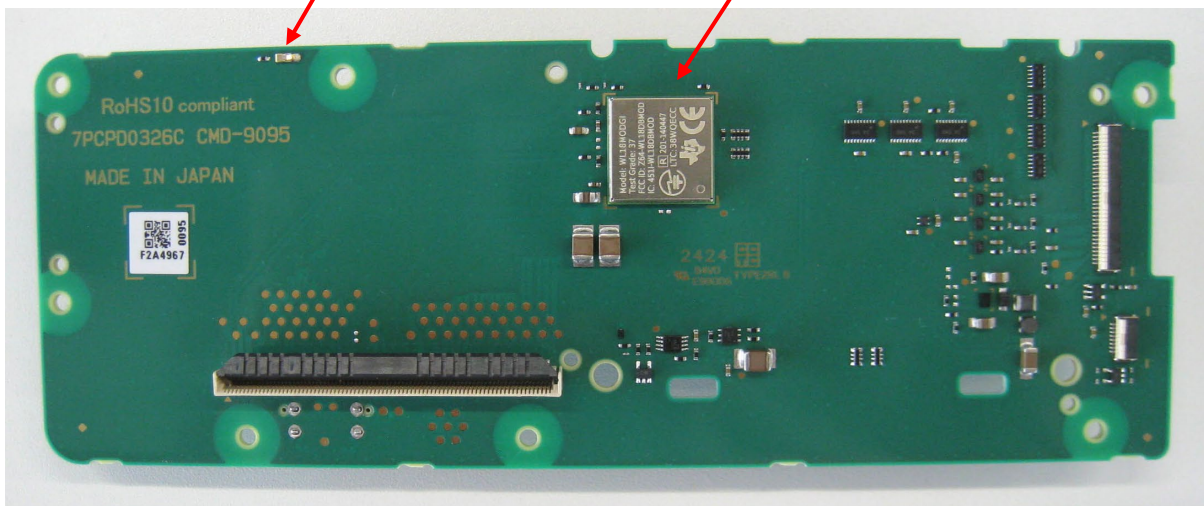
BT/WiFi antenna clipped onto plastic cover piece on back side of Keypad/LCD board
